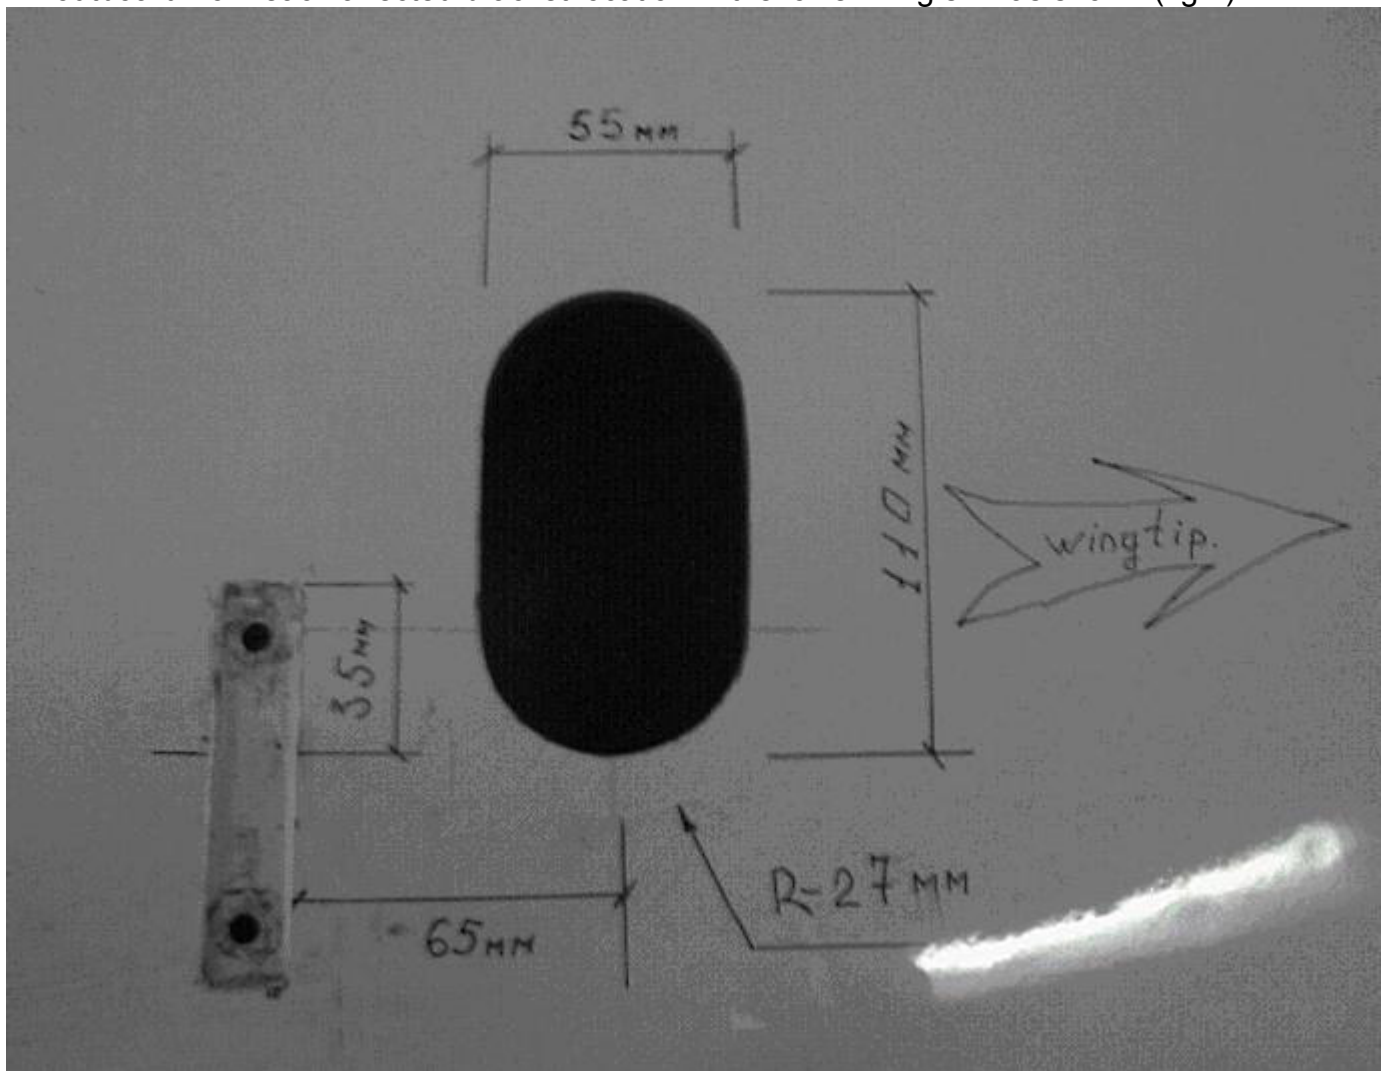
access hole in wing lower surface, outboard of bracket skin holes
